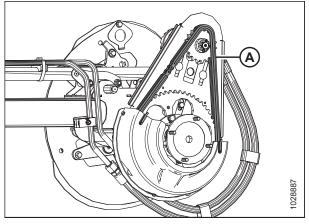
Drive Chain – Double-Reel Drive Shown
